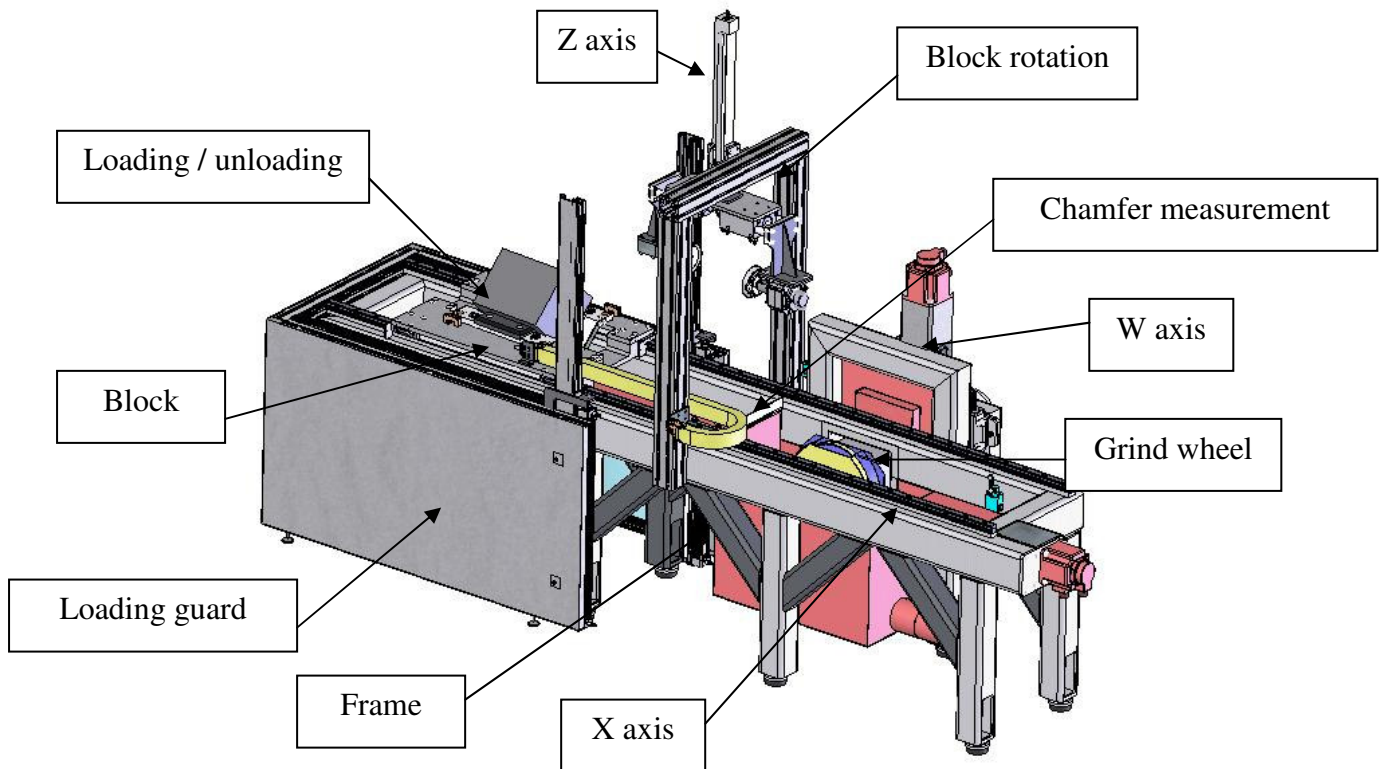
Chamfer Machine Layout (rear guarding removed)
